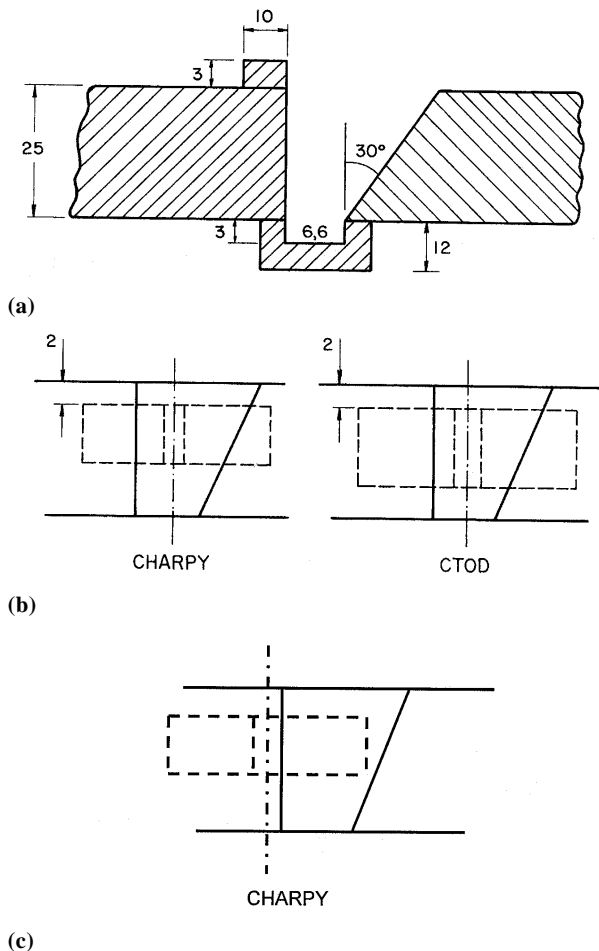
(a) Schematic showing the weld joint for shielded metal arc welding. (b) Schematic of sampling, showing the notch position and depth from surface, for Charpy V-notch and crack tip opening displacement test pieces for the weld metal. (c) Schematic of sampling, showing the notch position and depth from surface, for Charpy V-notch for the heat affected zone. (All dimensions are in mm.)
